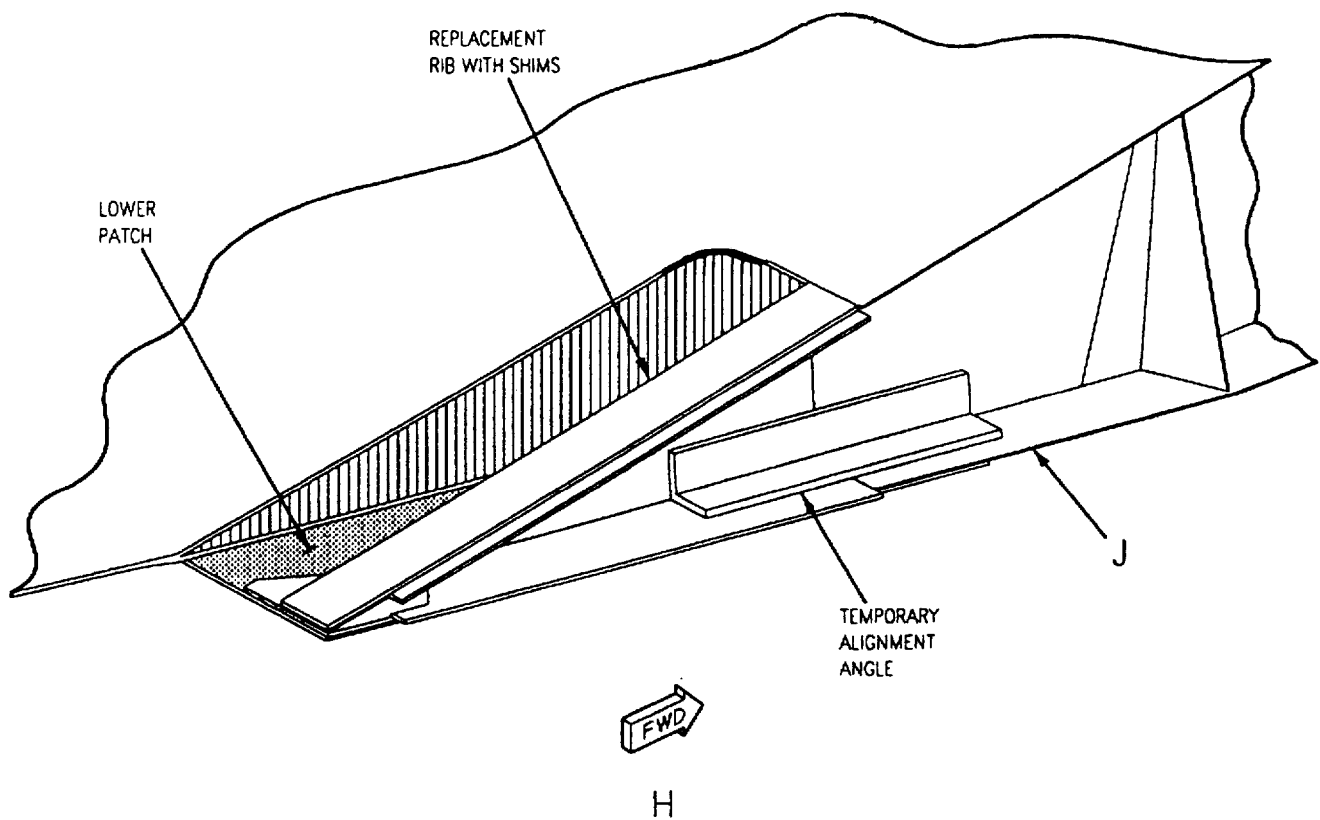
Inboard Aft Closure Rib and Skin Damage Repair (Sheet 7)
